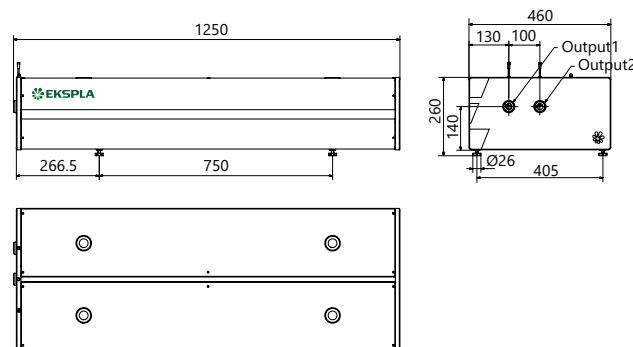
NanoFlux N2k10-SLM laser head outline drawing (actual dimensions might vary)
